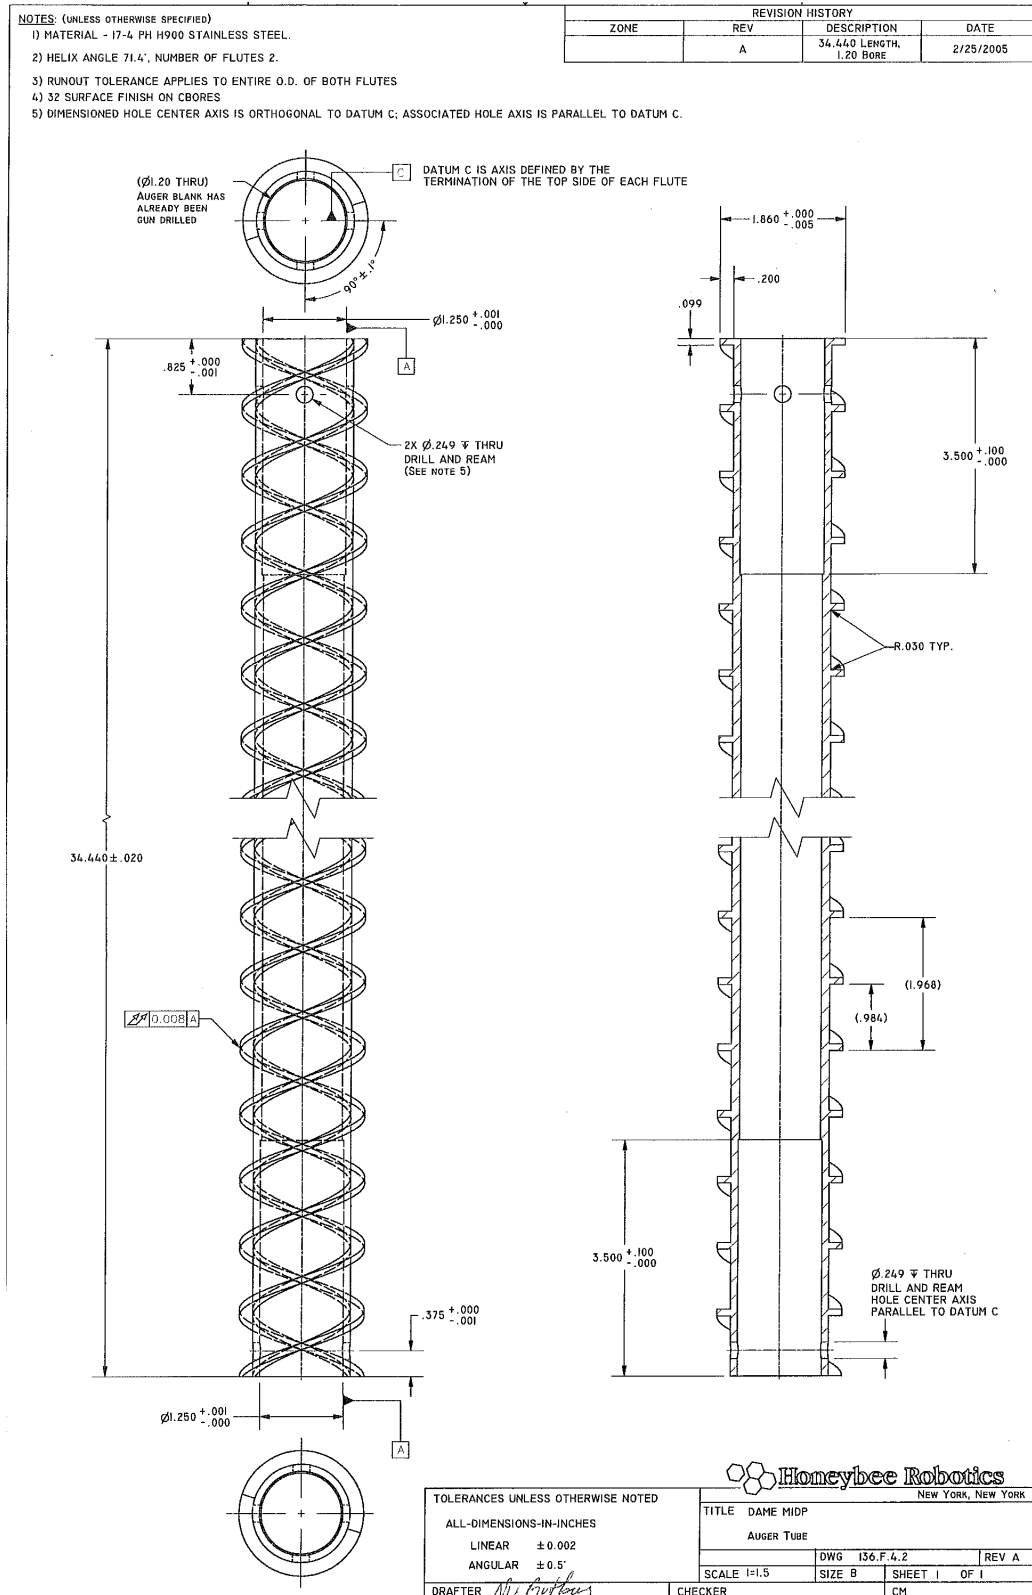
Engineering Drawing of DAME Drill Auger Tube.
